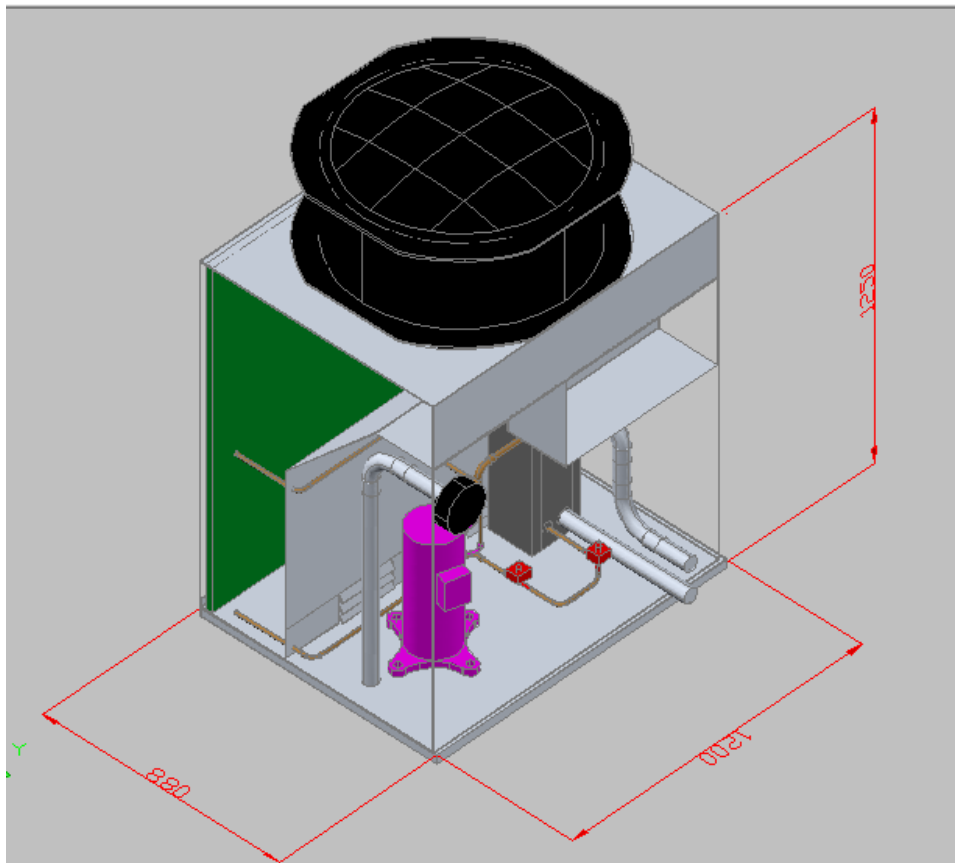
Isomeric view for the R-290 chiller assembly with external dimensions
